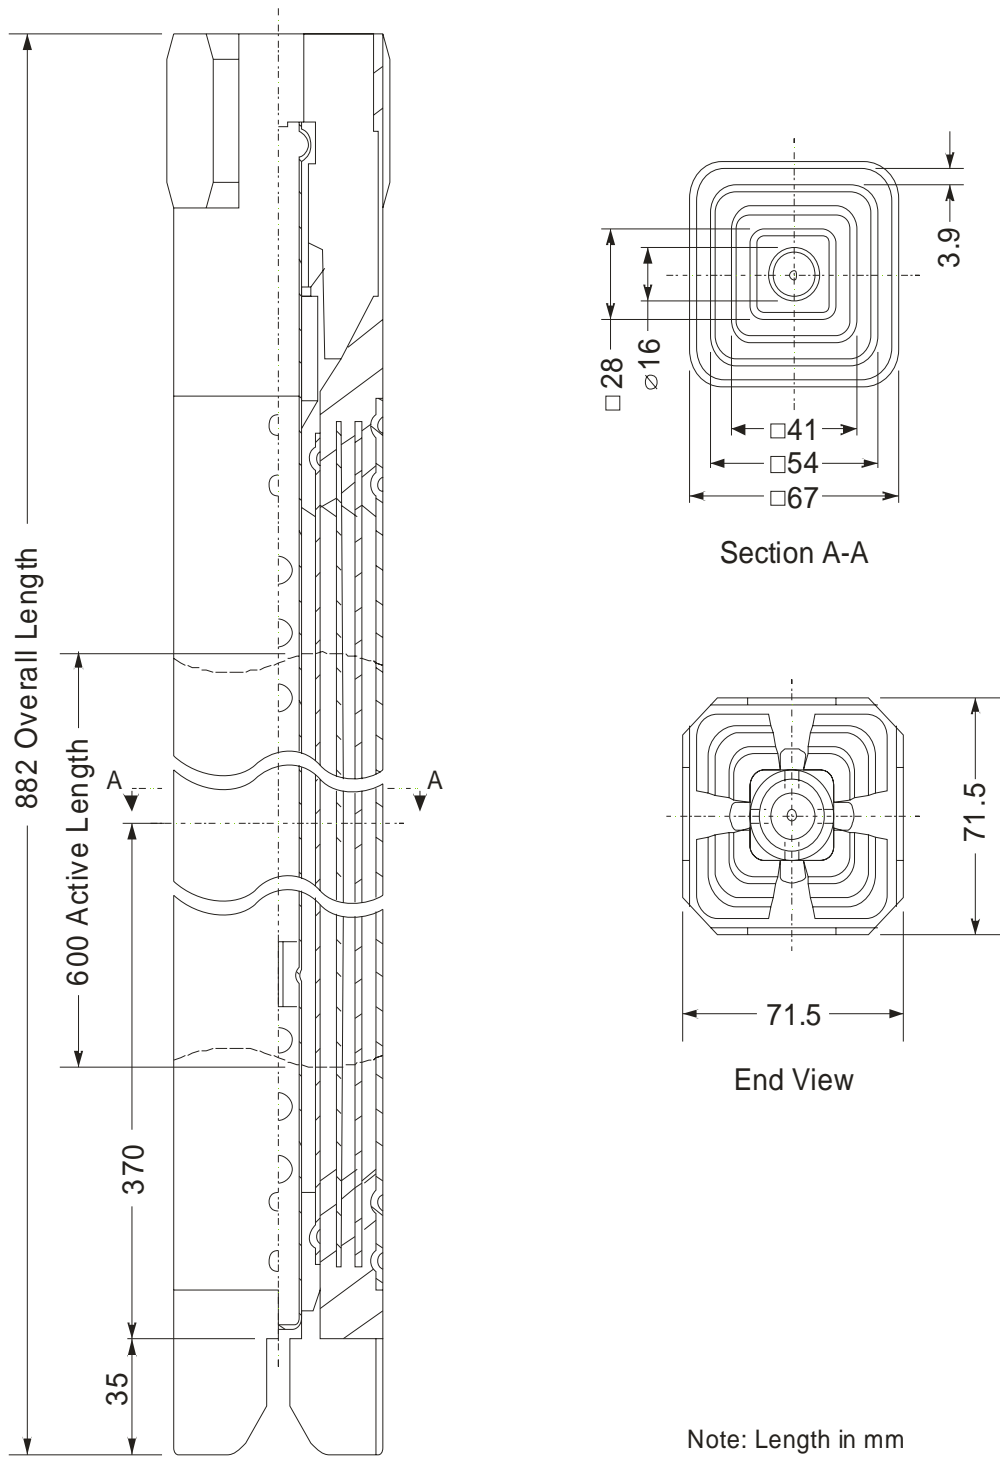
Russian research reactor four-tube IRT-2M fuel assembly.
